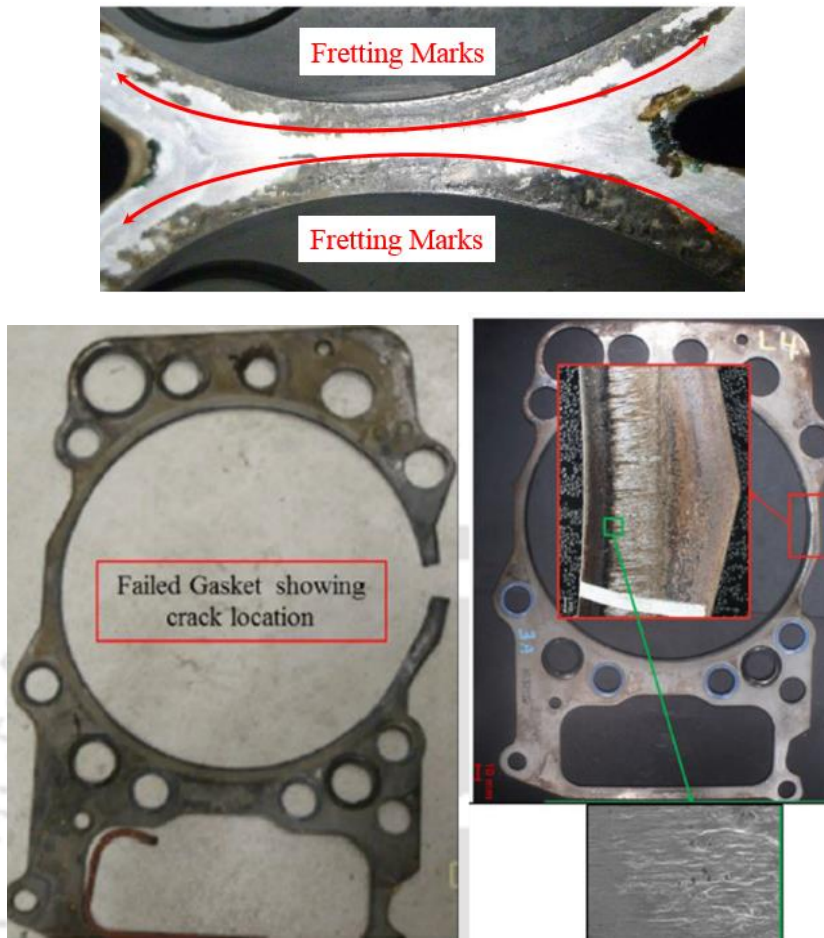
Fretting failures observed at the head gasket joint (Reprinted with permission from [28, 31])
